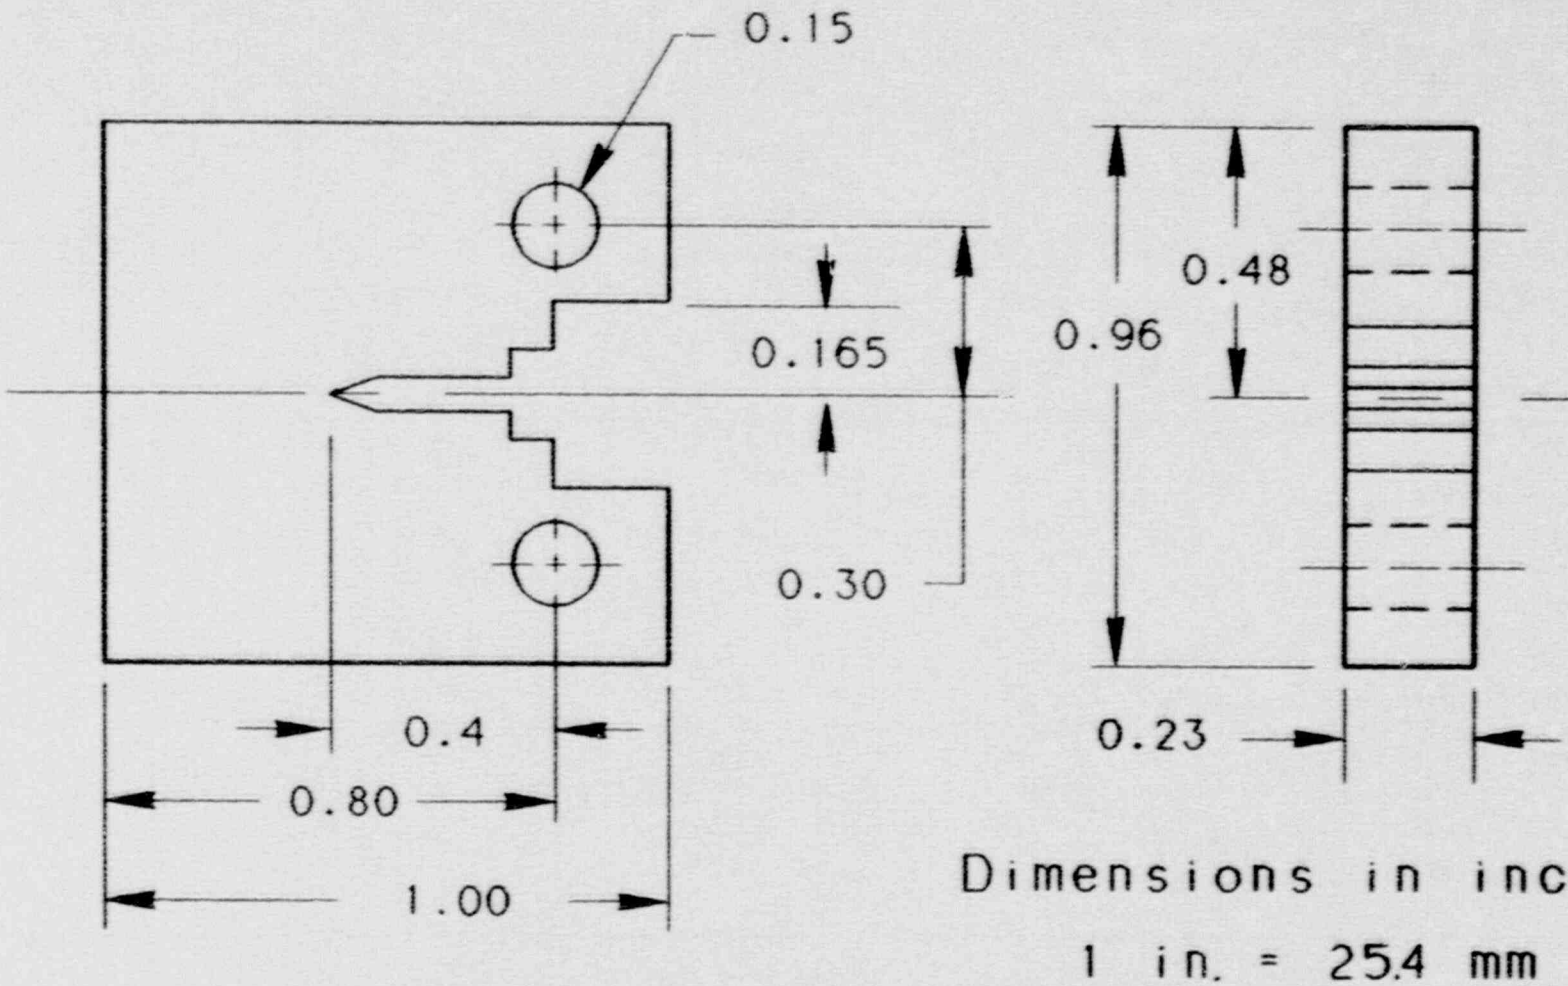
Fracture toughness tests of A 106 Gr. B (Heat ZP13) used this 0.5T-CT specimen design with a thickness of 5.8 mm (0.23 in.).
